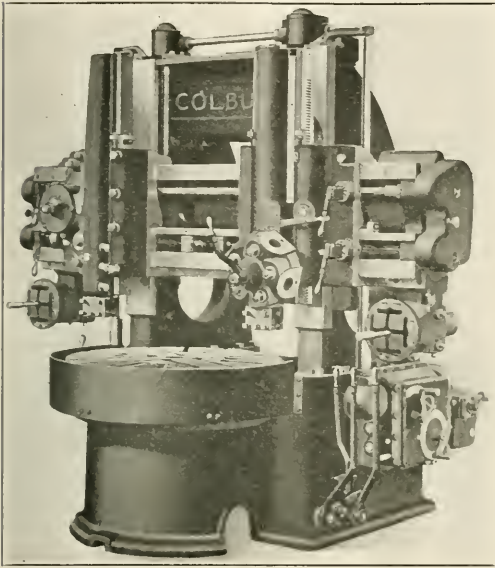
Colburn Mill with One Turret and One Swivel Head
